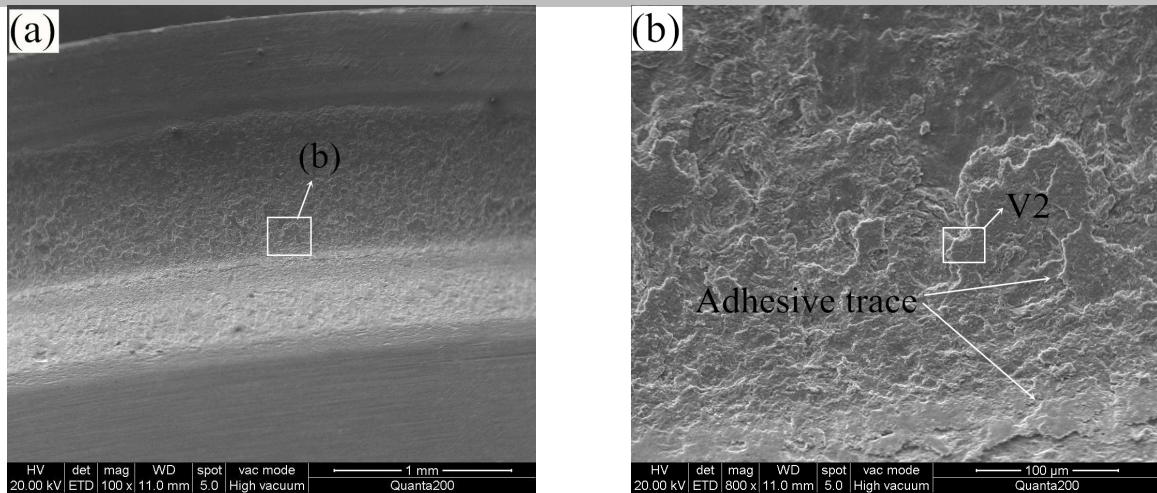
(a), (b) Worn surfaces of valve 2 seating face and EDS test area V2.
